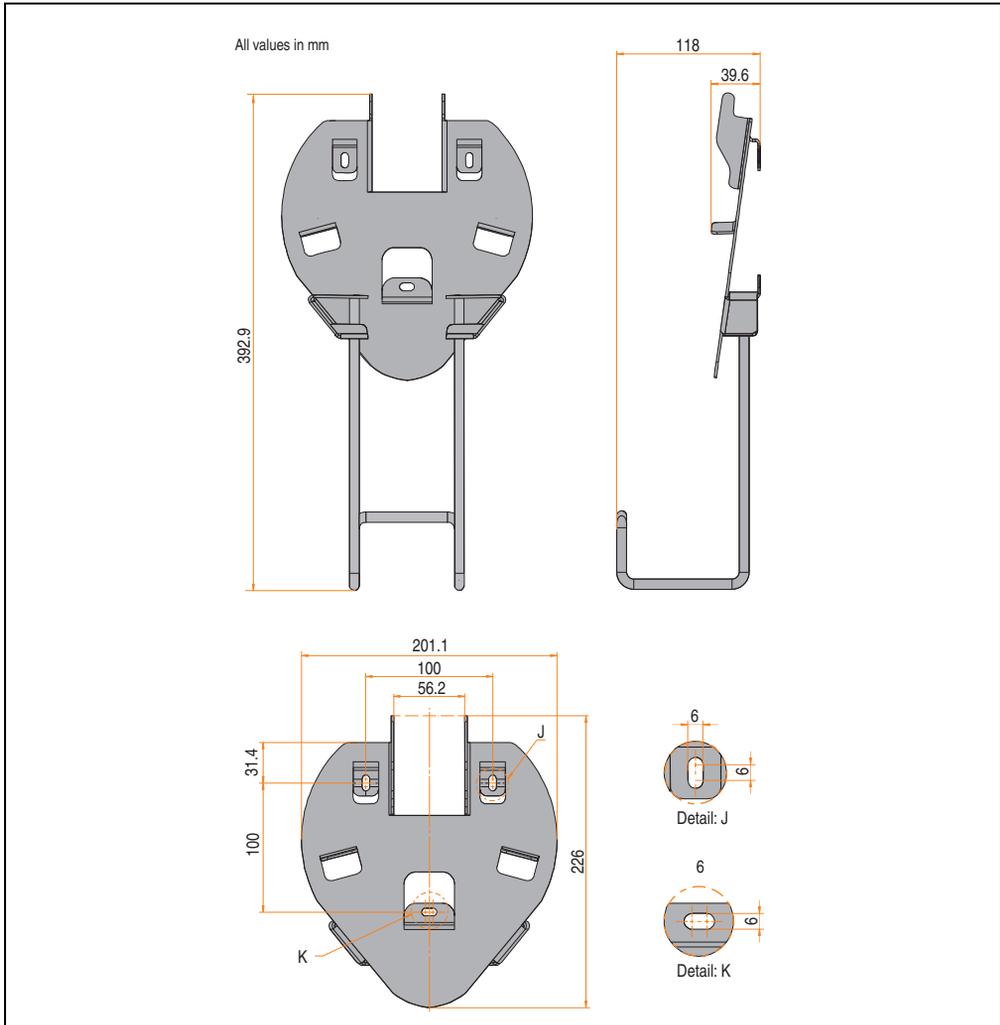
Dimensions - Wall mount 4MPBRA.0000-01
